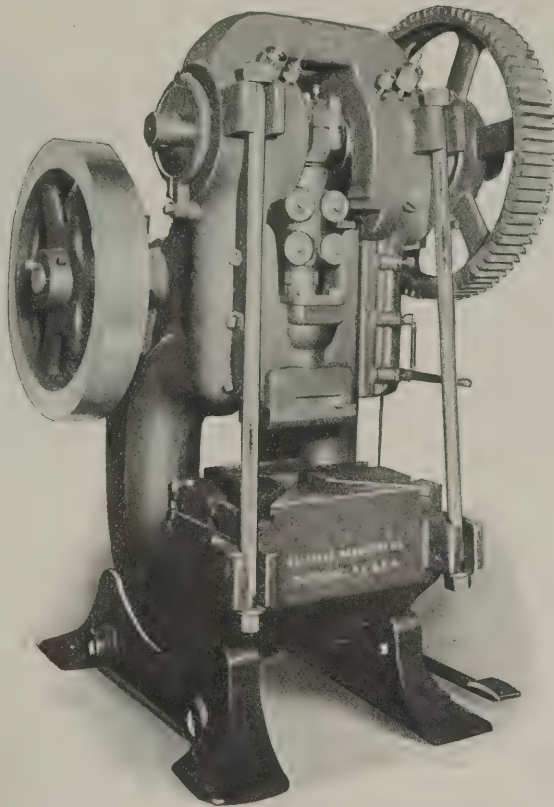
Heavy Back-gear Press built by Standard Machinery Co
